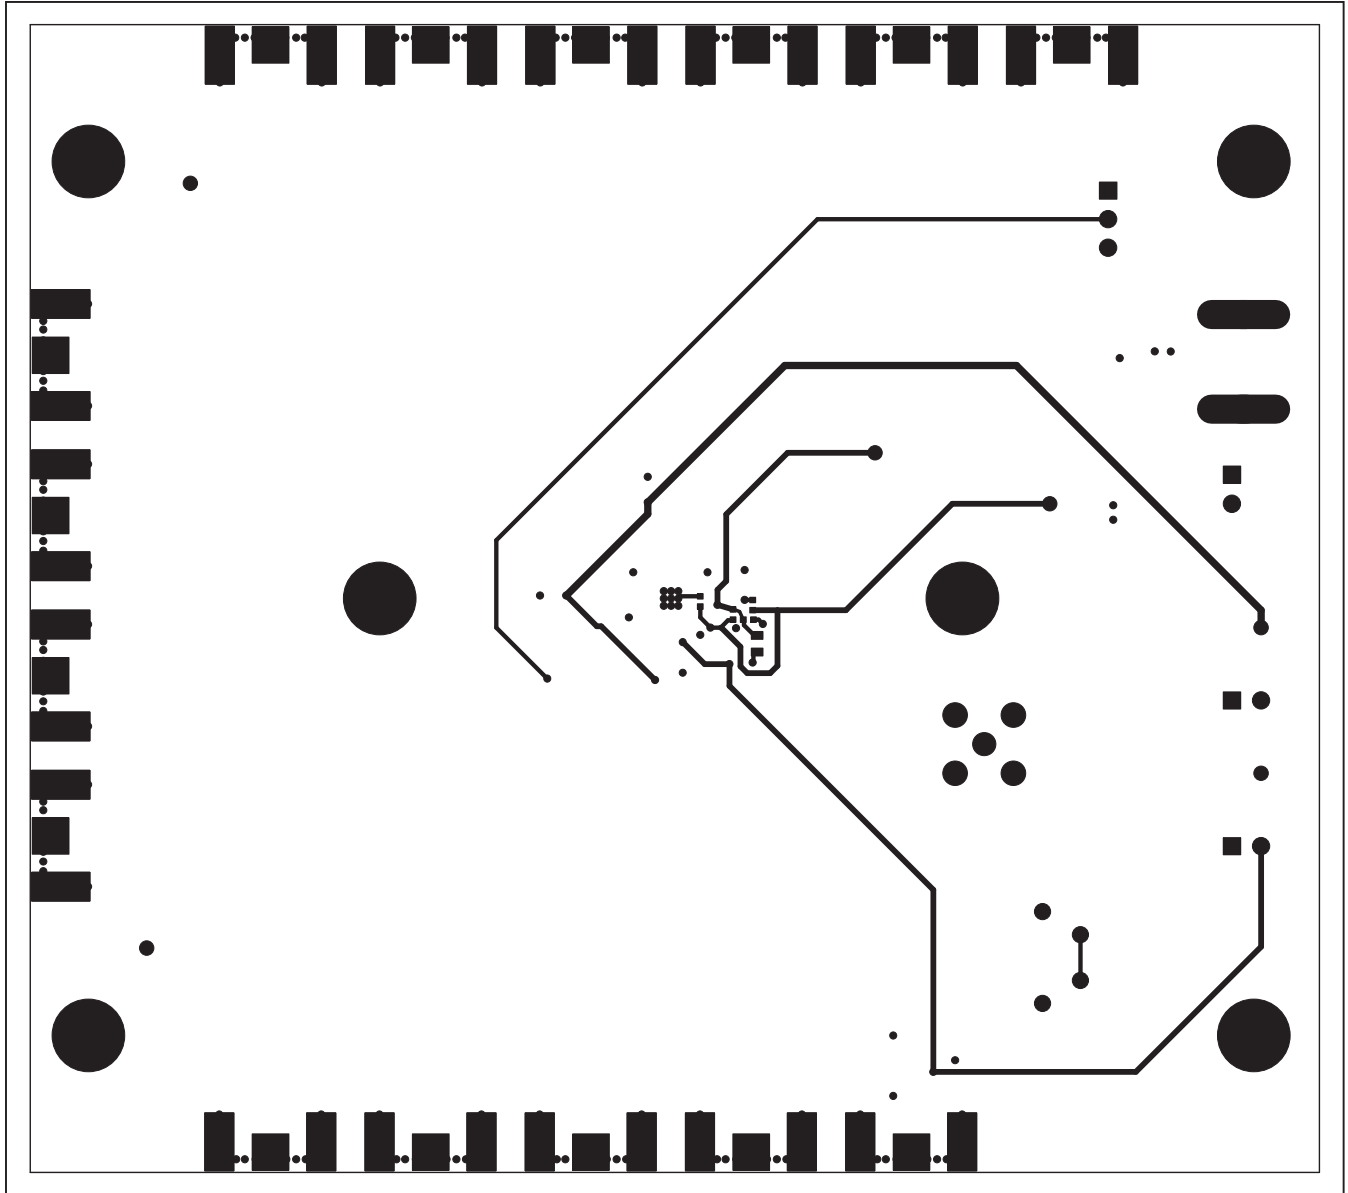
MAX3677 EV Kit PCB Layout—Solder Side
